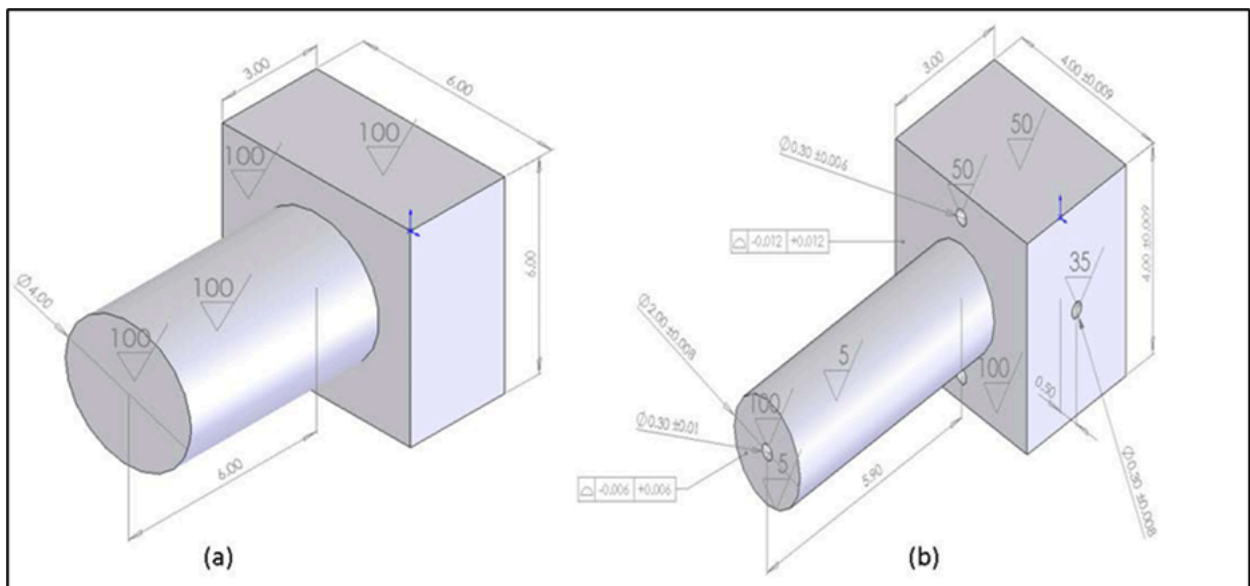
Dimensions of stock (a) without hole (b) with hole
